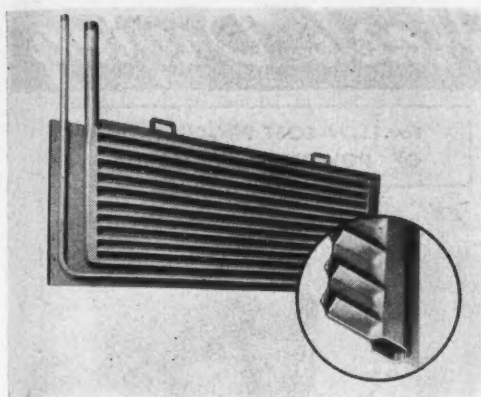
Closeup shows how steel plates are embossed and welded to give easy and efficient flow to steam
